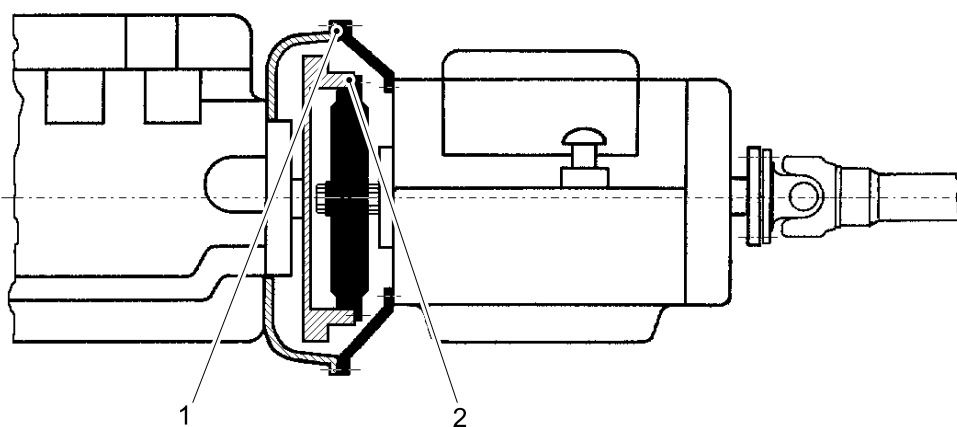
1 – Flywheel housing, 2 - Flywheel
